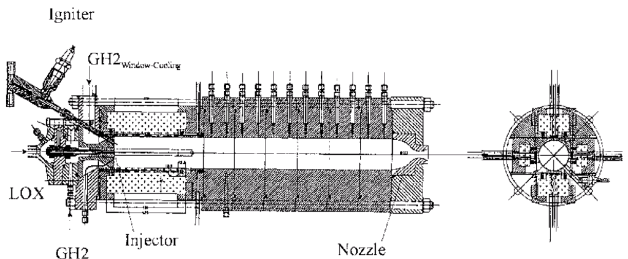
Windowed single injector model combustor, inner chamber diameter is 50 mm.
